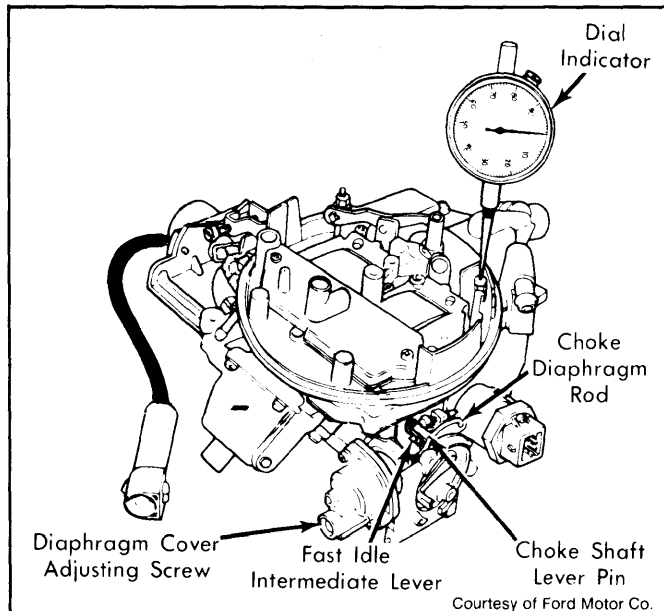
Adjusting Choke Control Diaphragm (7200 Models - At 0°F Position)
